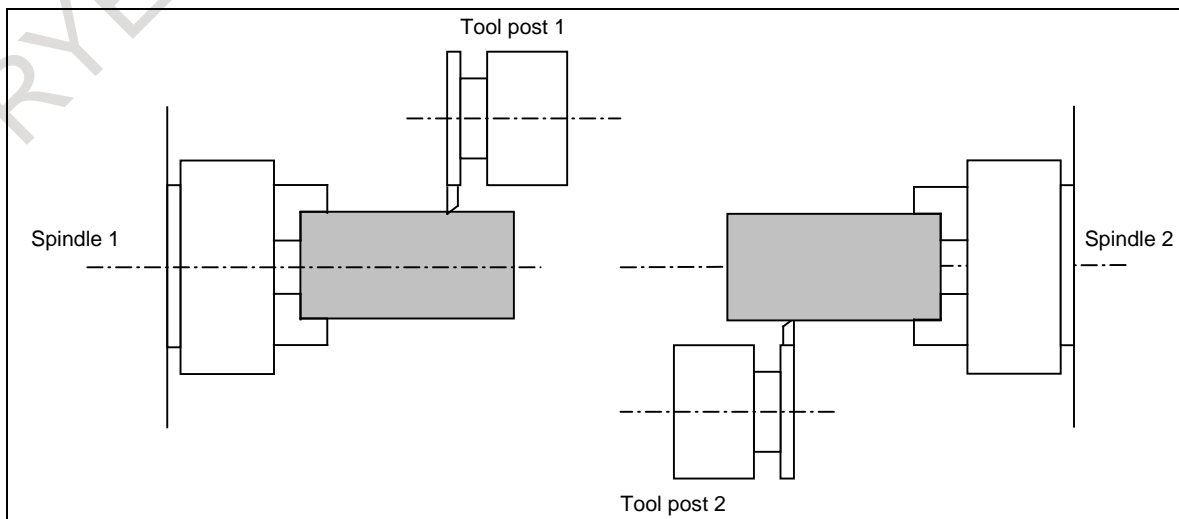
(b) Application to a lathe with two spindles and two tool posts
